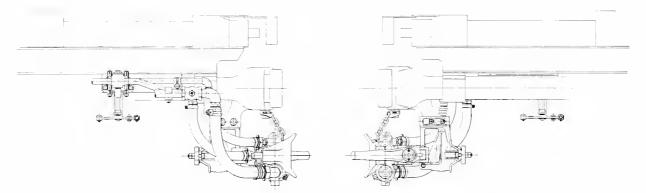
Acme Pipe Clamp for Attachment to Bottom of End Sill. Western Railway Equipment Co.
